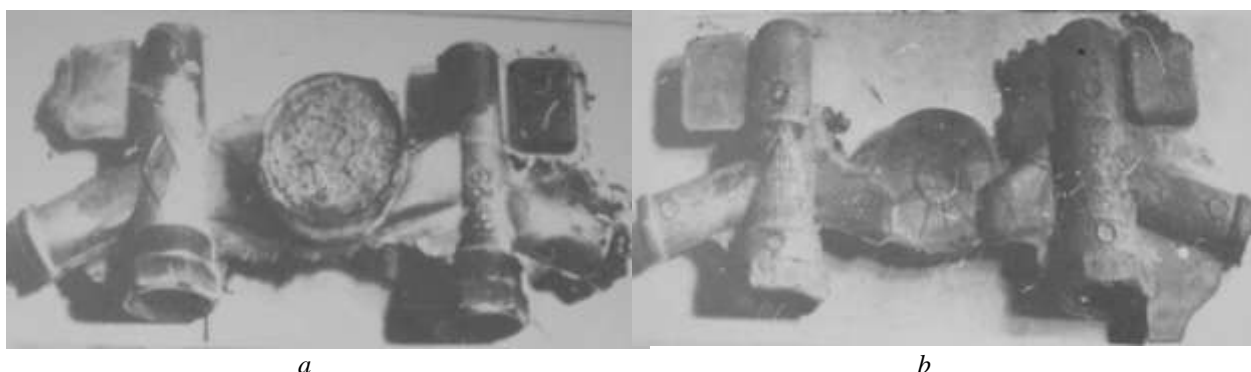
Deterioration of the surface of castings during the operation of molds: 10 removals (a); 2000 removals of castings from LS-49 (JIC-49) brass (b)
